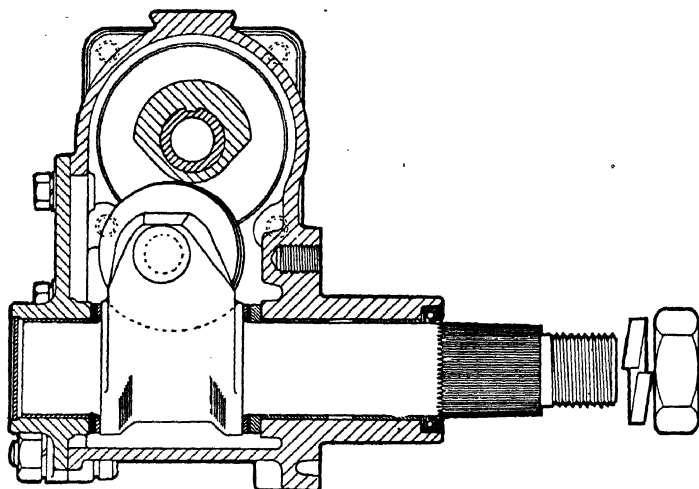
Rocker Shaft of Double Roller Type Marles Steering Gear
